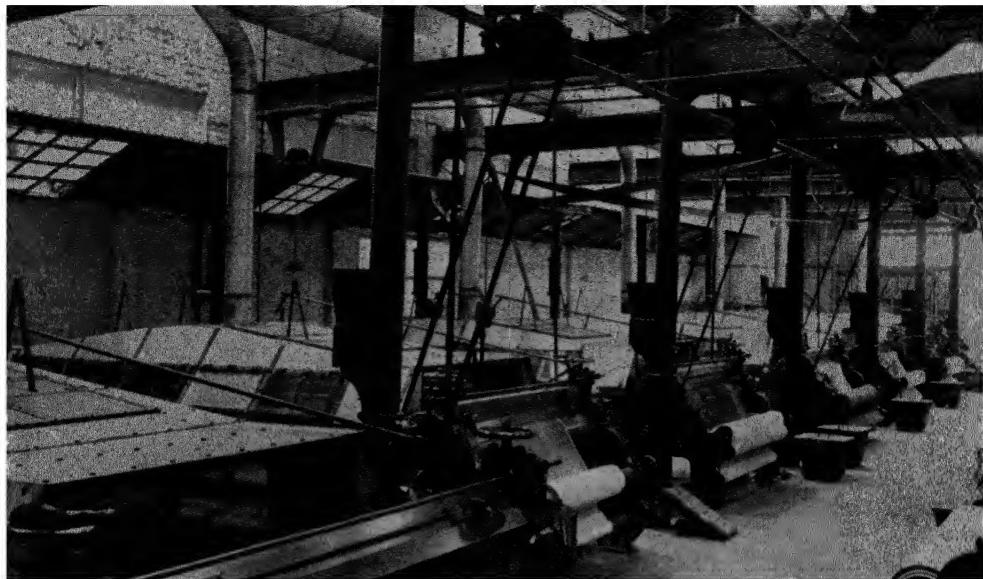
A BATTERY OF "SPREADING MACHINES," USED FOR COATING FABRICS WITH A THIN LAYER OF PASTY RUBBER "DOUGH"
